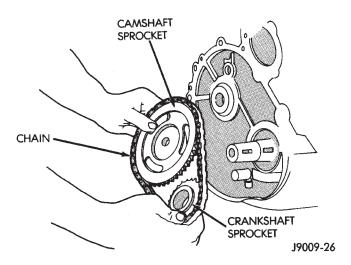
Camshaft and Crankshaft Sprockets and Chain
